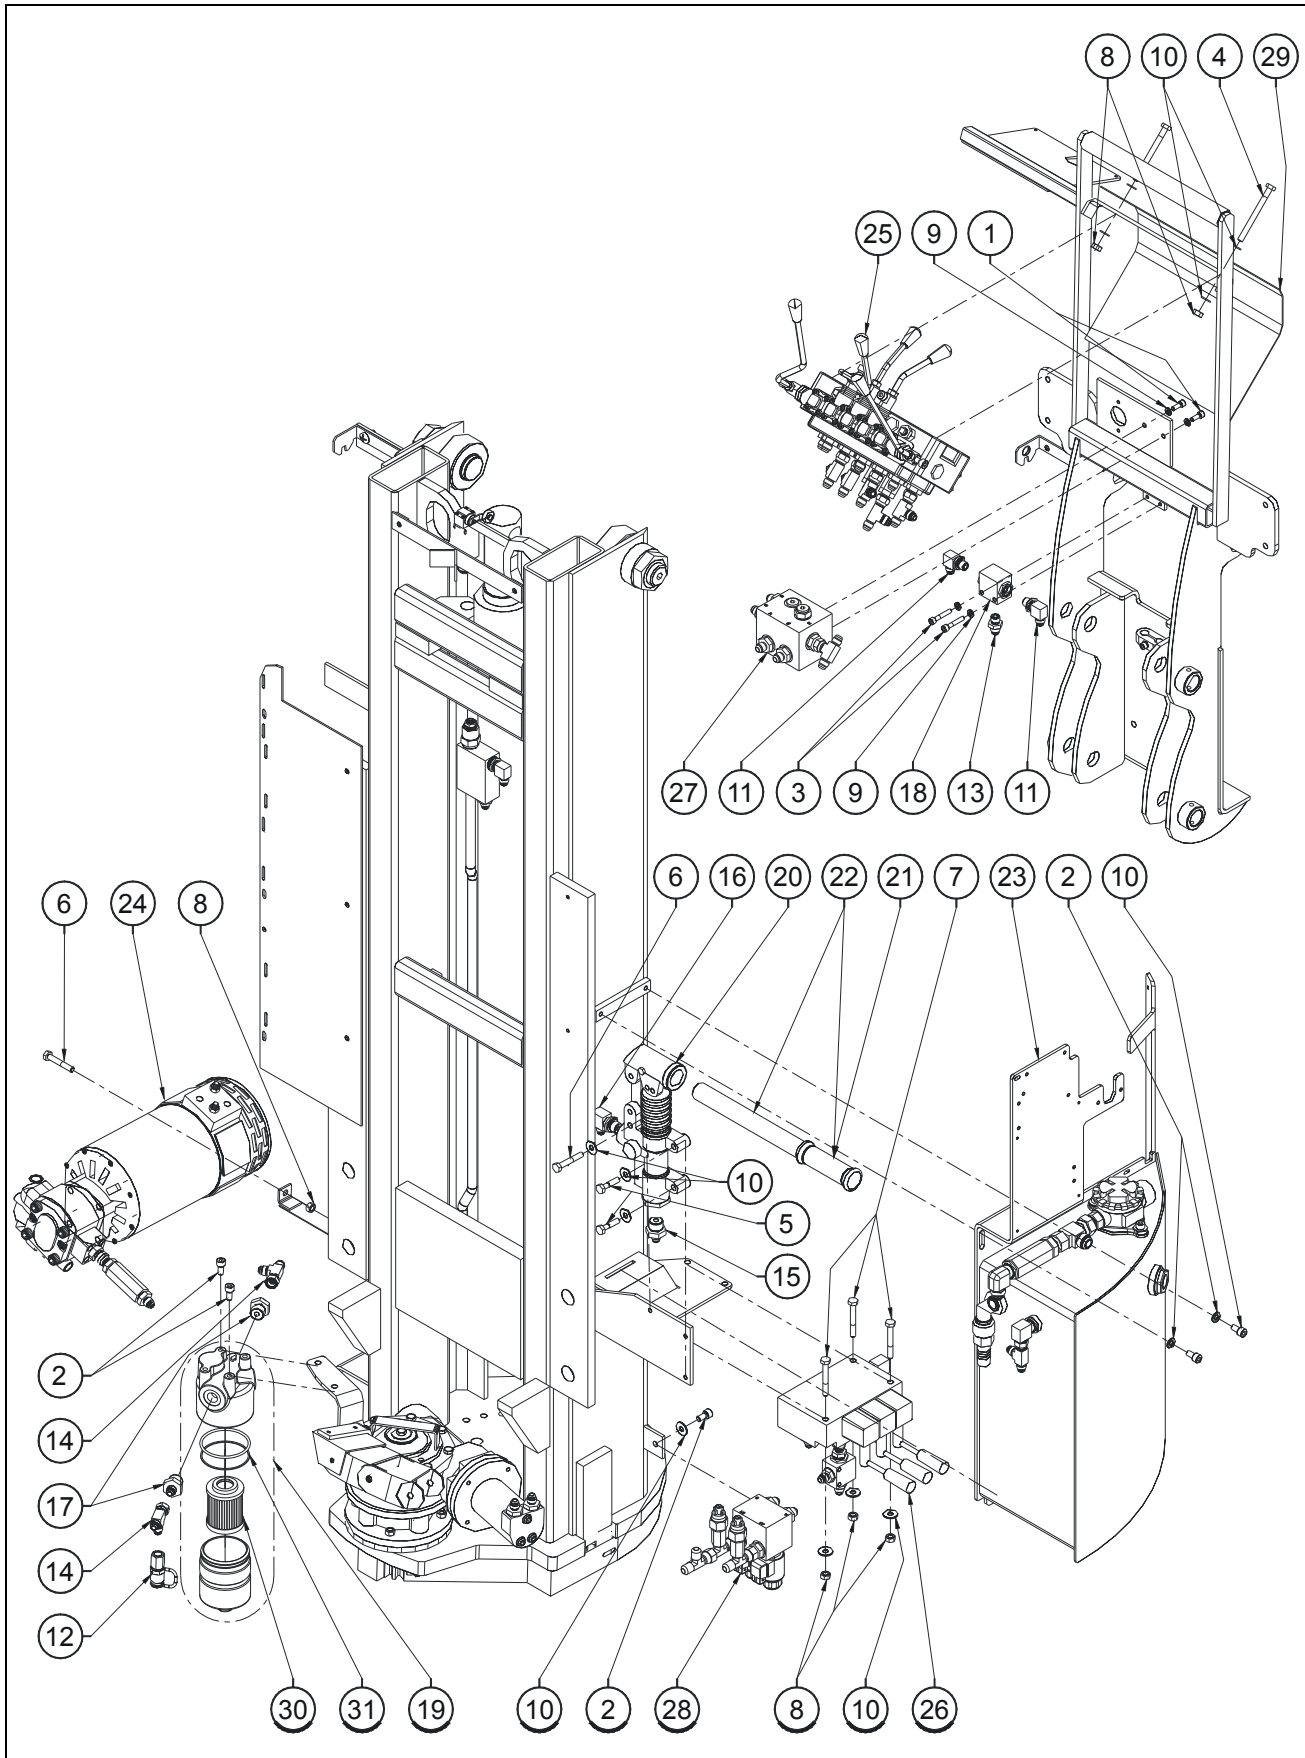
POWER BRIDGE INSTALL / INSTALLATION CHAINES PORTE-CABLES
